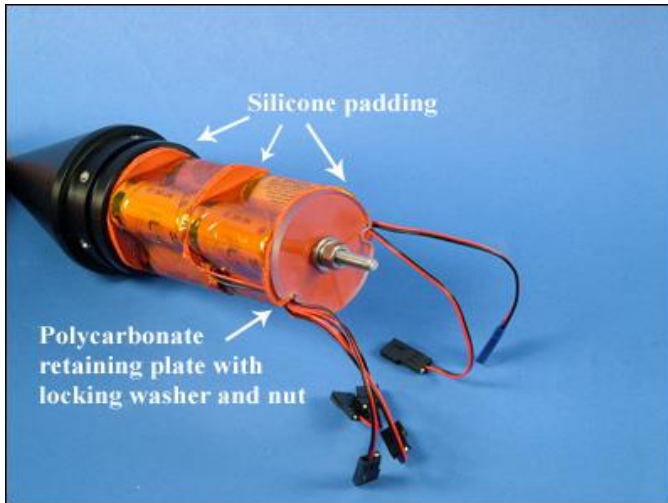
Battery assemblies with leads properly dressed, silicone padding, polycarbonate retaining plate and locking nut and washer assembly in place.
